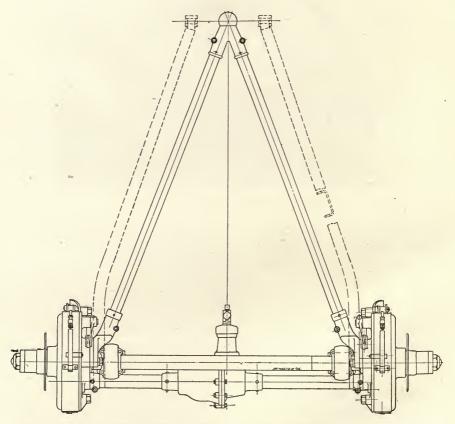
Triangular Torque and Radius Rods Applied to Internal Gear-Drive Axle.
